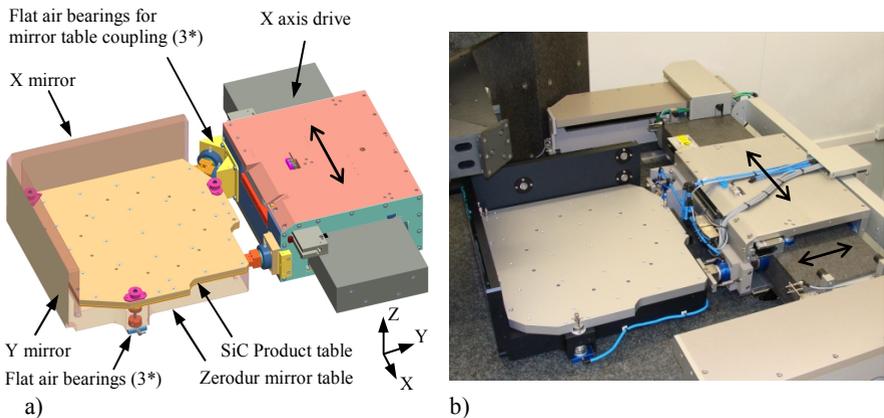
a) Design of floating mirror table and X-axis drive; b) Realized assembly with temporary aluminum mirror table.
